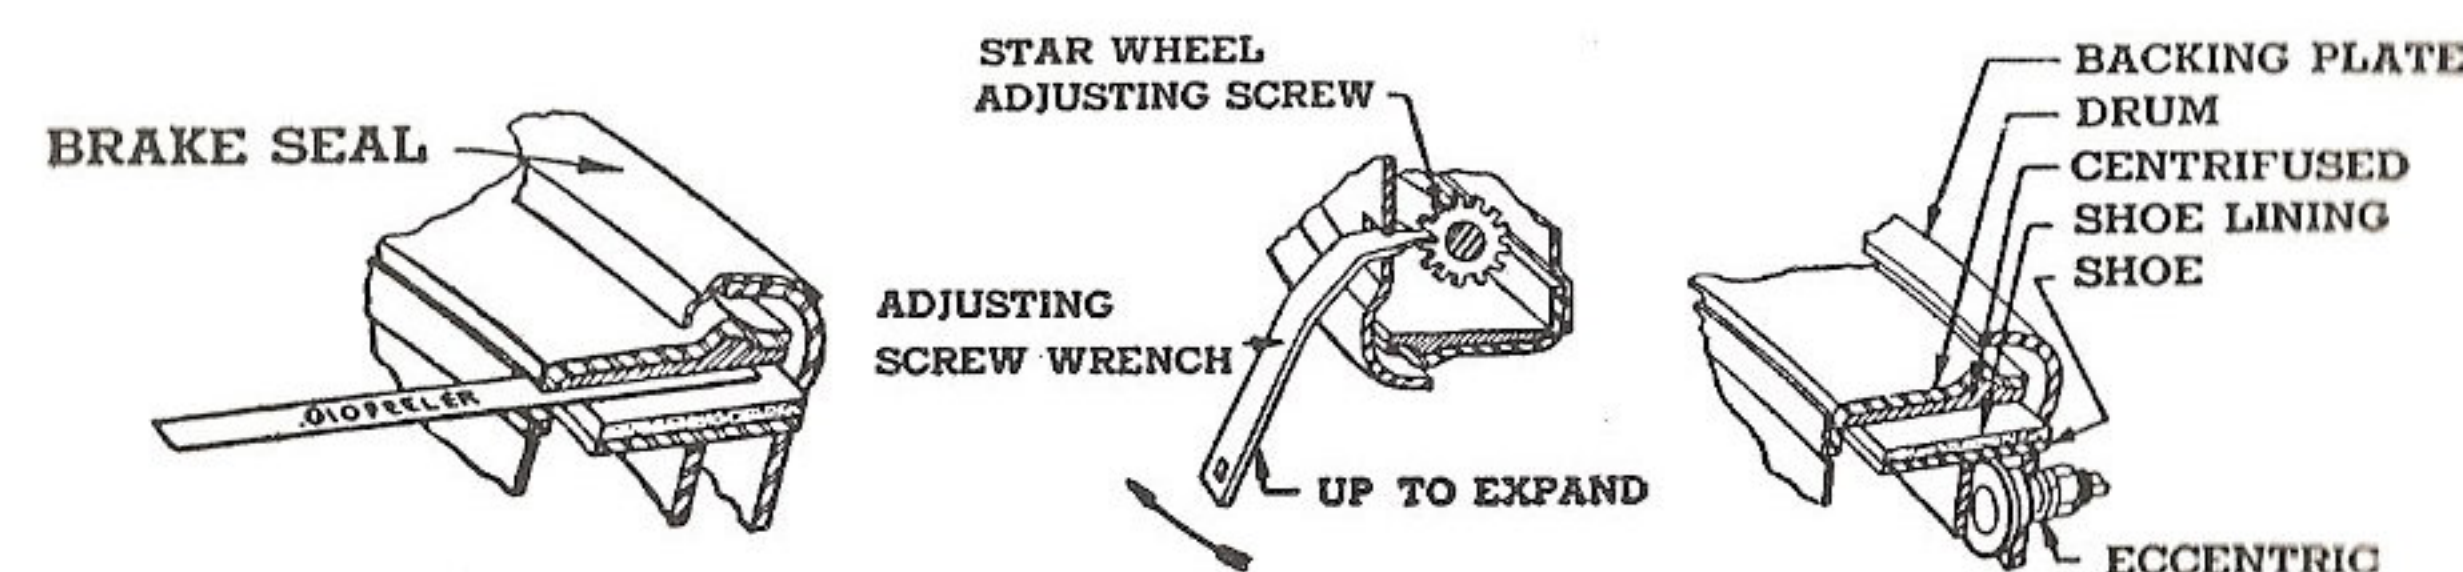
Left View Shows Method of Checking Lining Clearance with .010" Feeler Blade. Center View Shows Star Wheel Clearance Adjuster which may also be Turned with a Screwdriver. Right Hand View Shows Outer End of Eccentric in Contact with Brake Shoe
